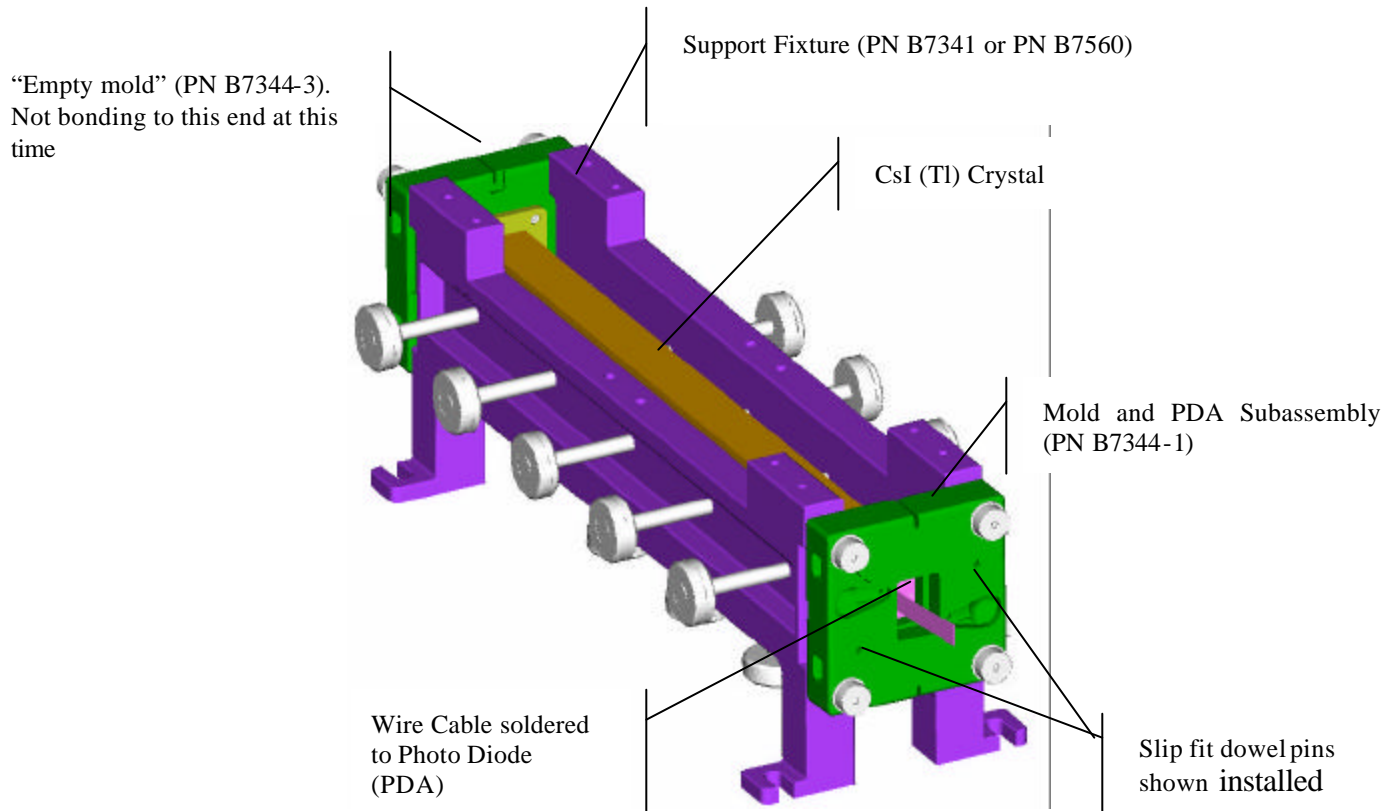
PN-B7340-1 Bond Set-up Assembly, Day 1
